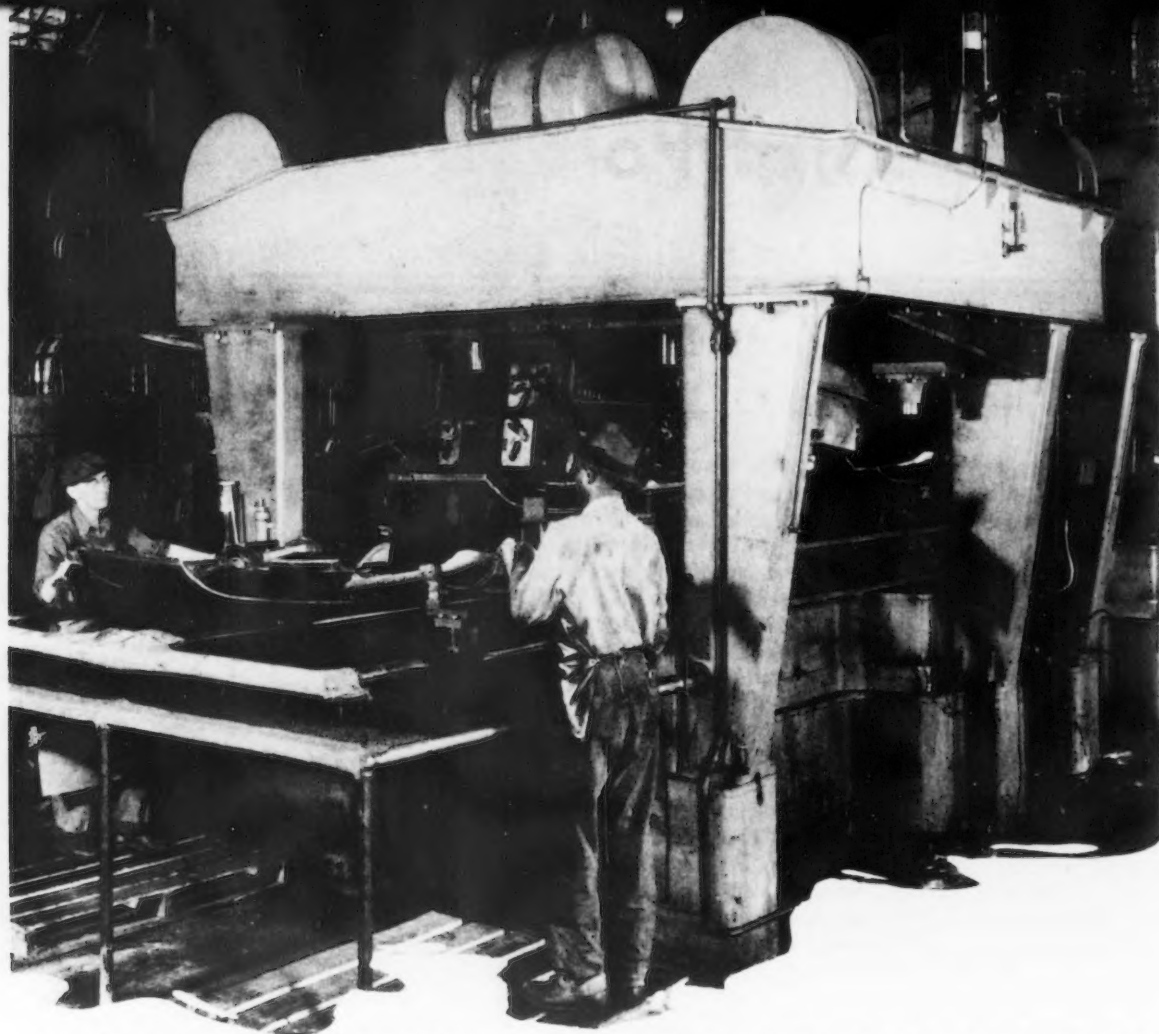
This pair of Hamilton presses is equipped with dies that spot weld quarter panels and advance the panels through five stations by cradles on a hydraulically reciprocated transfer frame.
